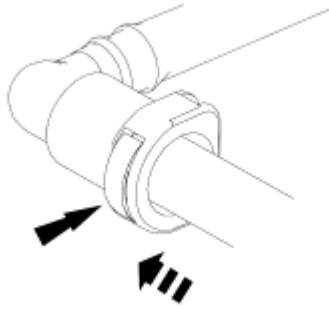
Locating Fuel Tube Quick Connect Coupling Button
